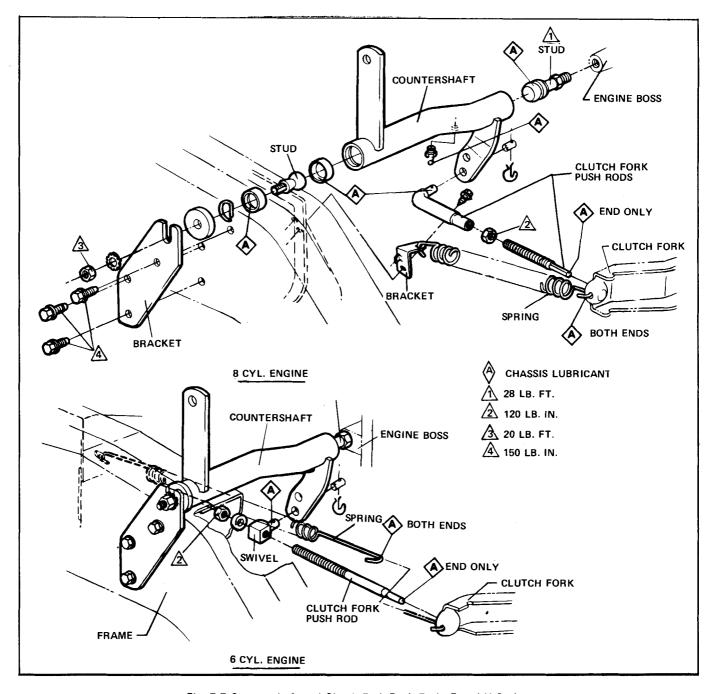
Countershaft and Clutch Fork Push Rod - F and X Series
